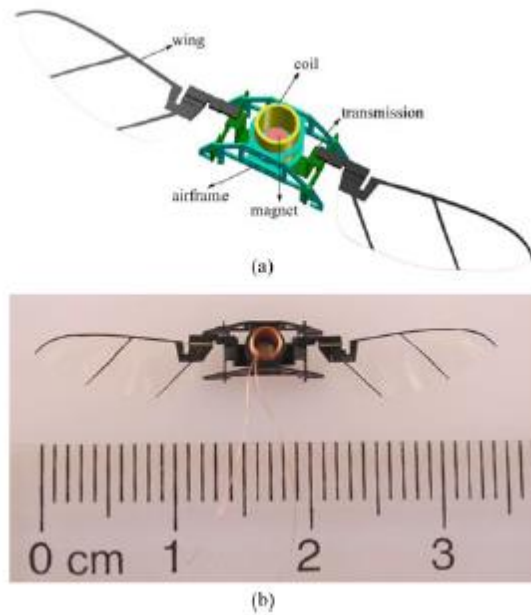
(a) CAD model of the robotic insect. (b) Prototype flapping-wing robot [12].
